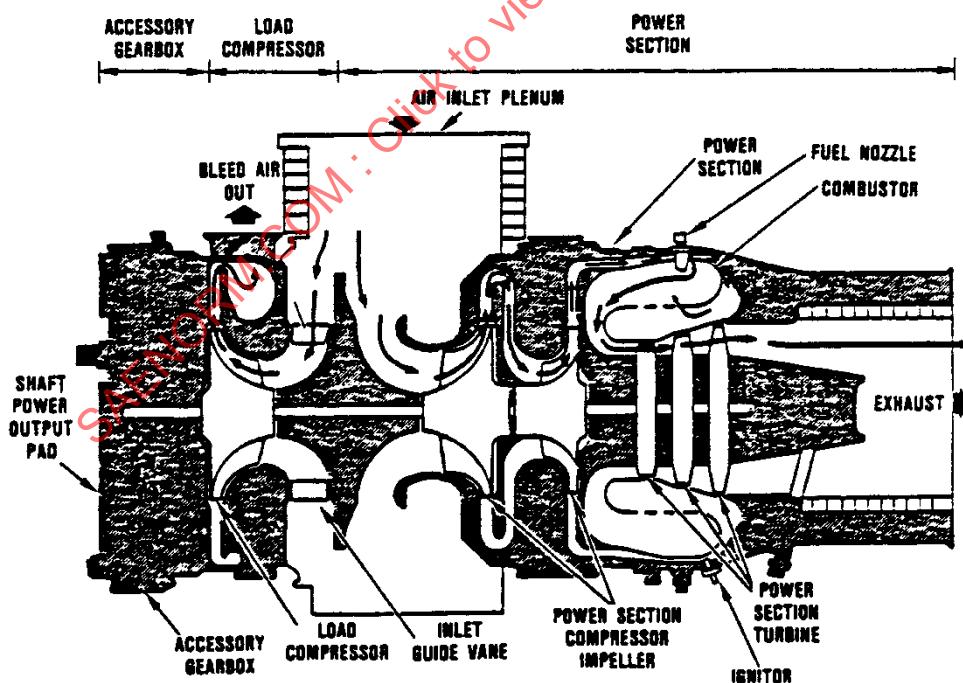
CROSS-SECTION OF A LOAD COMPRESSOR APU
